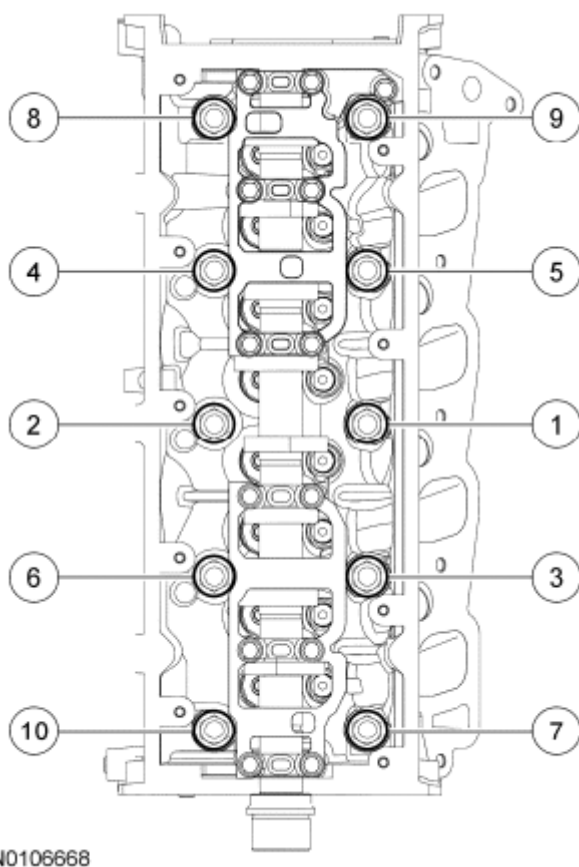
Identifying Cylinder Head Bolts Tightening Sequence (RH)
